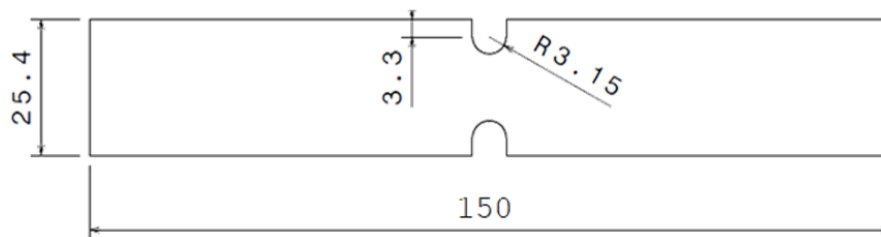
Dimensions of the biaxial test coupons – non-standard geometry.
